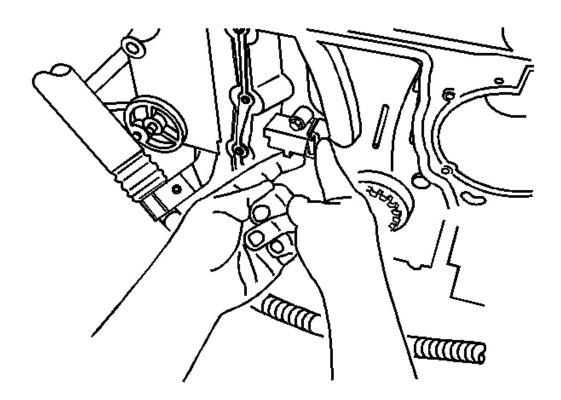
Releasing Timing Chain Tension Courtesy of GENERAL MOTORS CORP.
